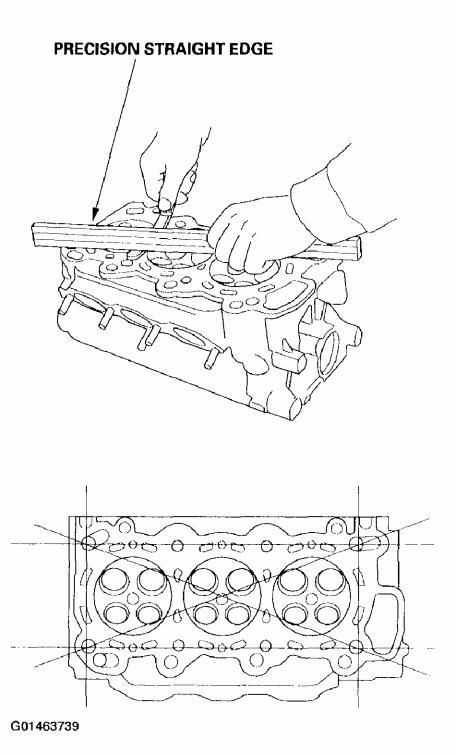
Checking The Cylinder Head For Warpage Courtesy of AMERICAN HONDA MOTOR CO., INC.
